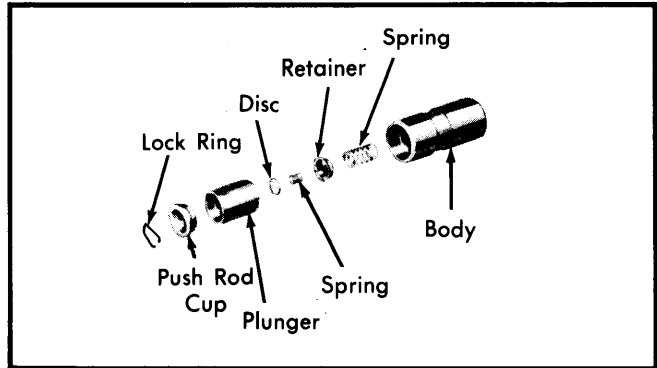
Exploded View of Hydraulic Lifter Assembly
